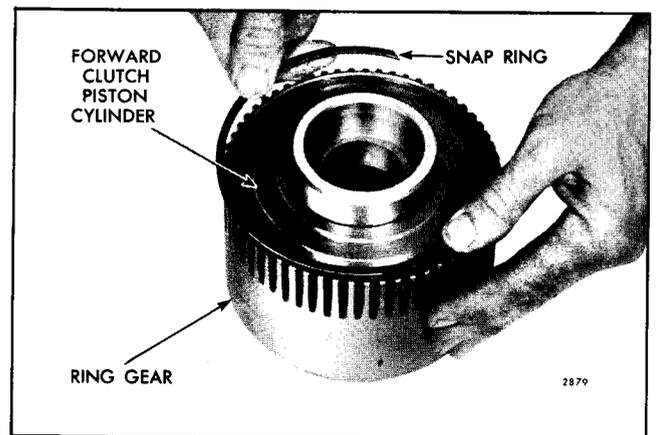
Installing Forward Clutch Piston Cylinder Snap Ring in Ring Gear
